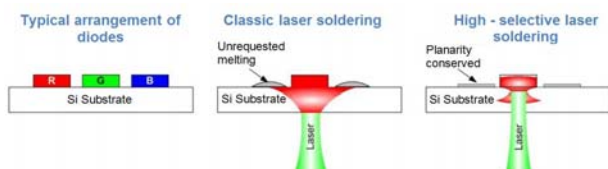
Concept of in-situ laser soldering with direct heat transfer to the soldering pad of a laser diode to further reduce the placement pitch by reduce heat spreading.
